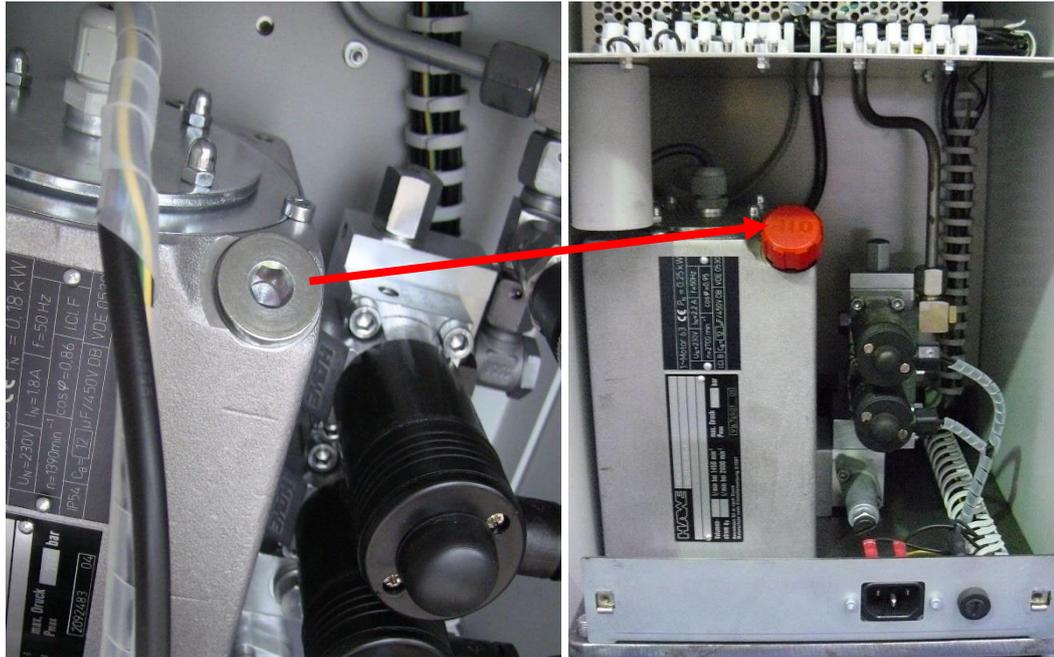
Replace the delivery screw cap with a press-screw cap.
